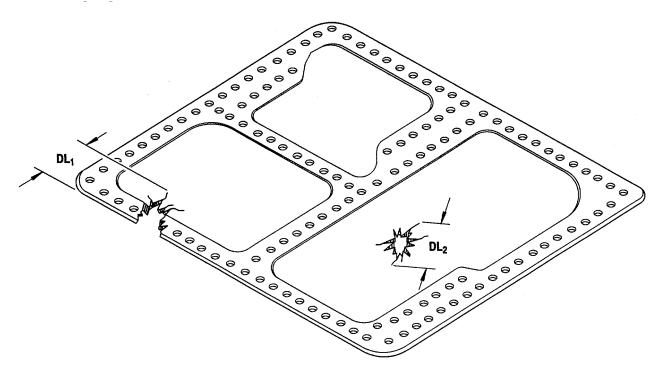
Evaluating Damage to Sheet Metal Floors and Decks
